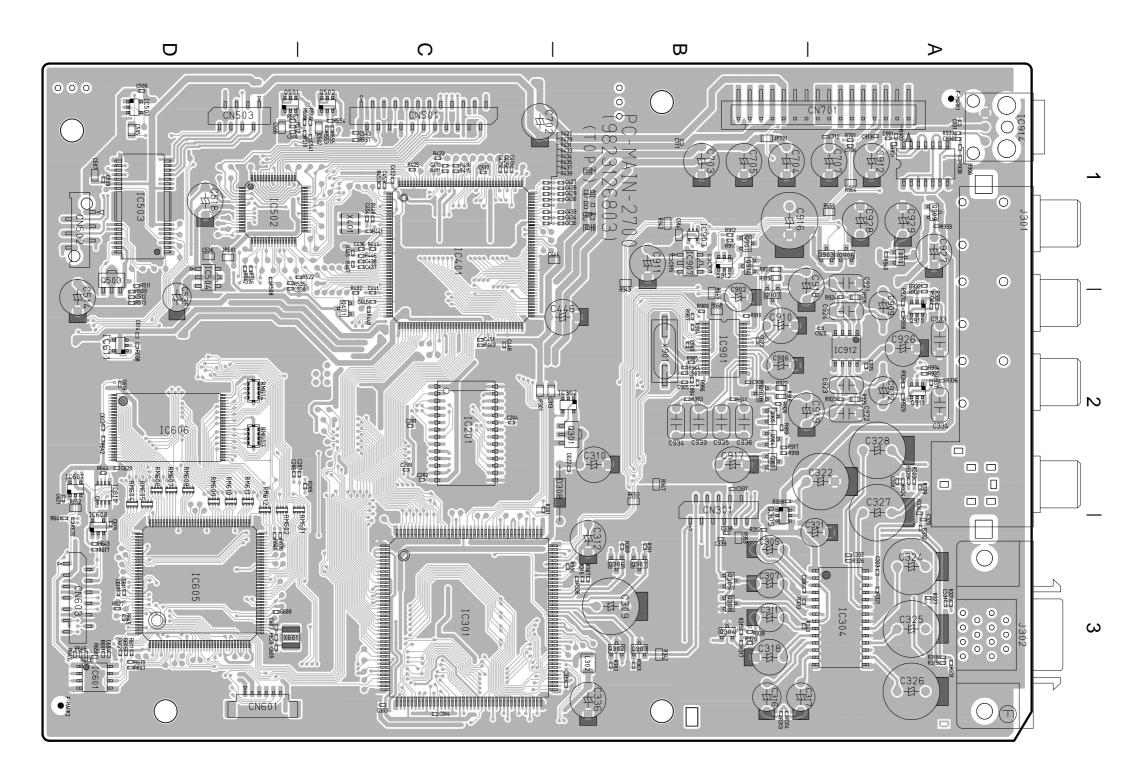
EU01 Main PC Board (Top pattern and Top parts location diagram)
